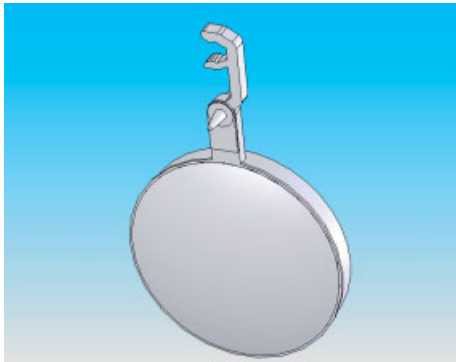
Typical injection-molded PC spectacle lens blank.
